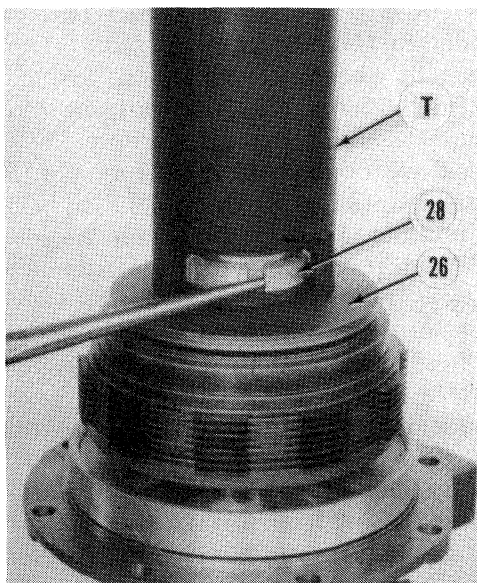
Use horseshoe shaped tool (T) and a press to compress Belleville springs.
